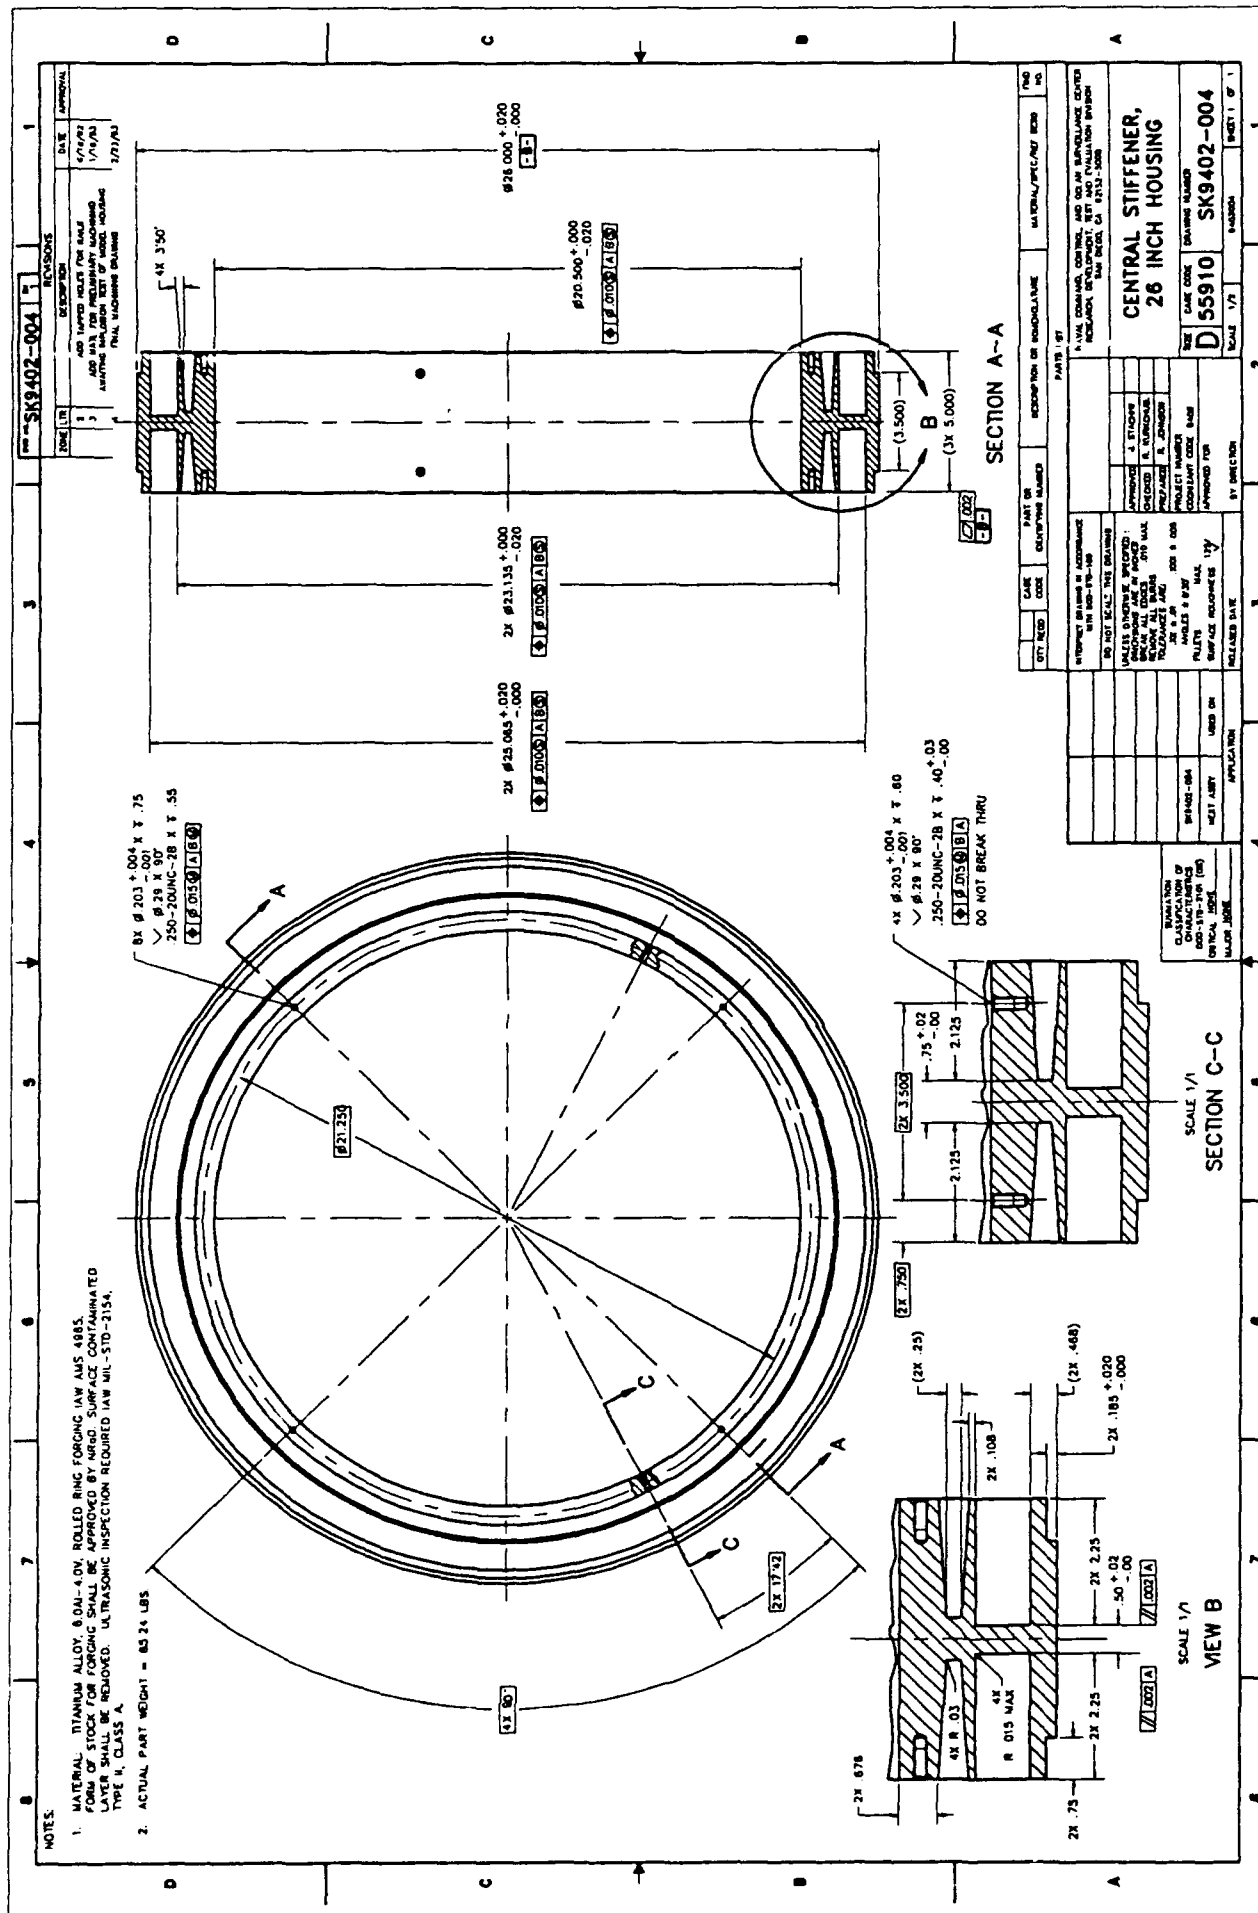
Engineering drawing of the 26-inch-housing cylinder end-cap joint ring.
